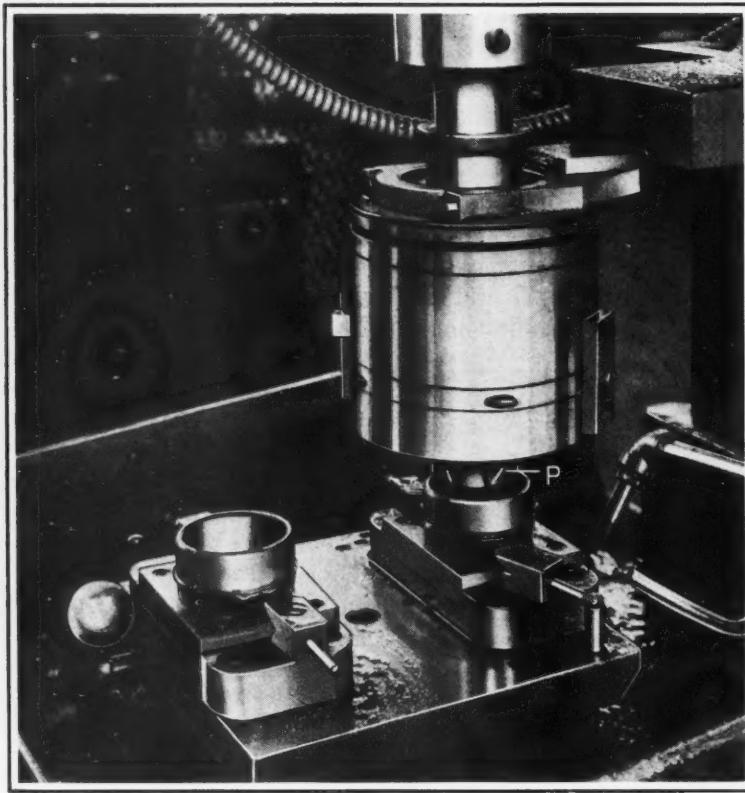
Piloted Die-head Employed for Cutting the External Threads on the Shock Absorber Reservoir
